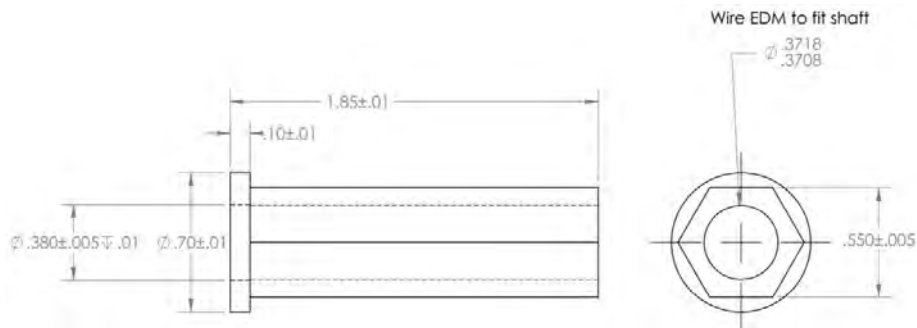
Aluminum Hex-Bore Sleeve (in inches) [89]
